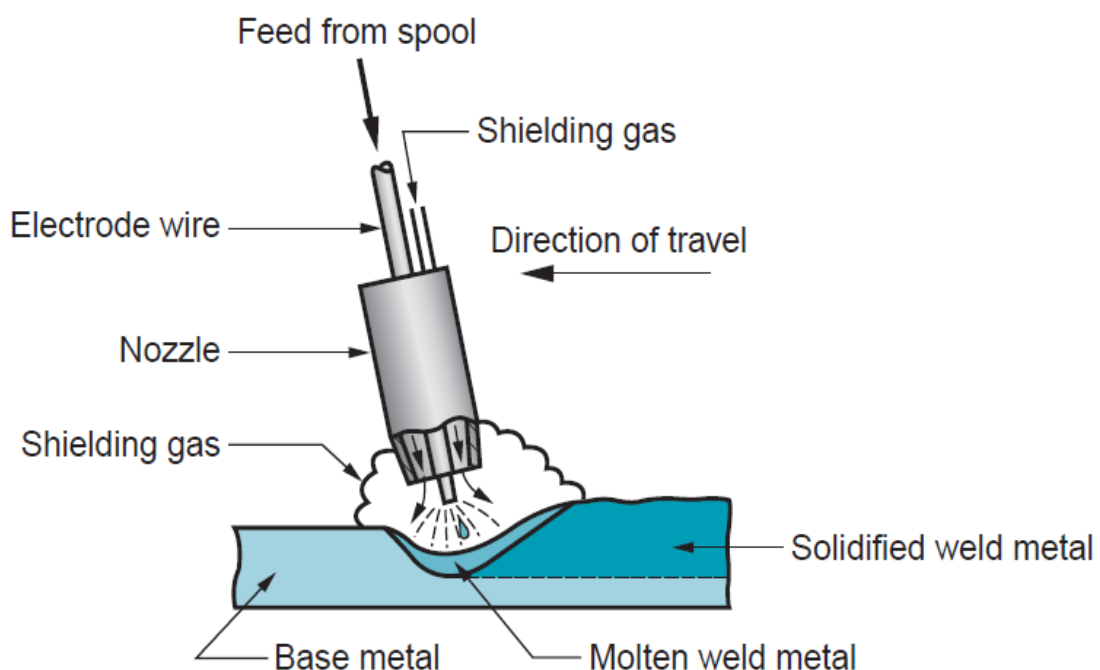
Gas metal arc welding (GMAW).
